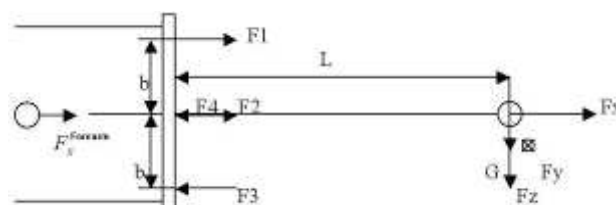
Scheme of the loadings on the fastening flange of the industrial robot's forearm
